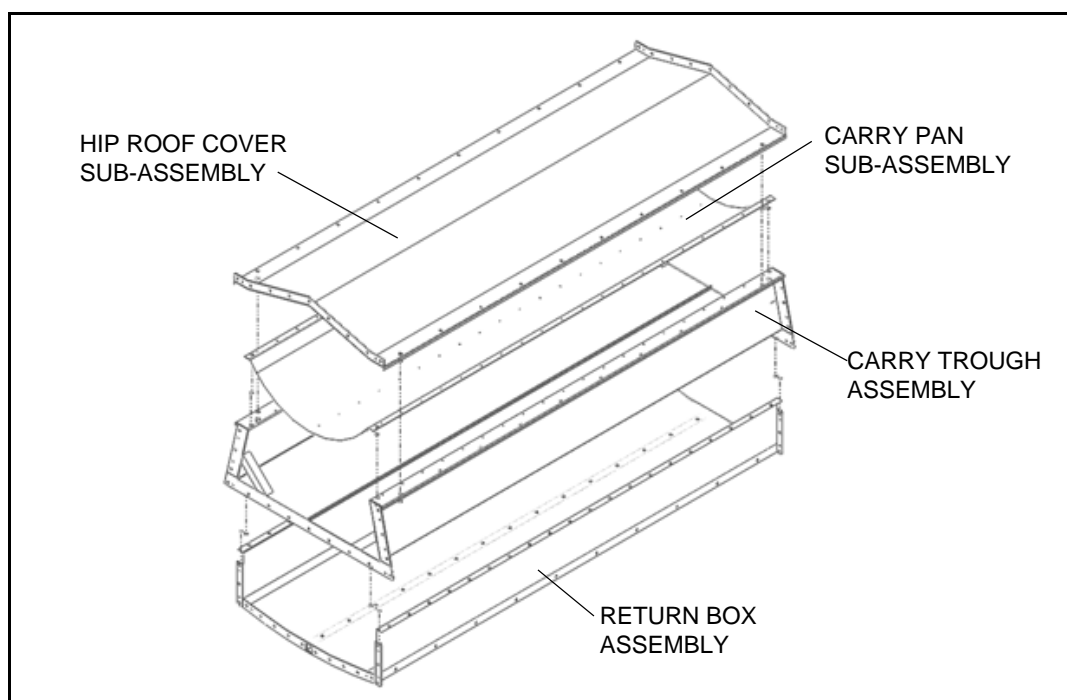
Exploded Isometric View of Intermediate Section w/ Air Return
